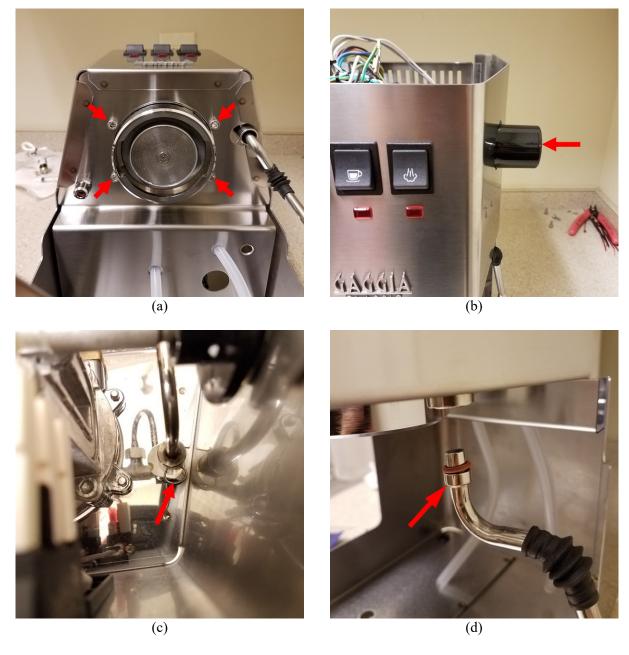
(a) Use a hex wrench to loosen 4 screws. (b) Pull out the steam knob. (c) Remove the clip. (d) Pull out the steam wand.
